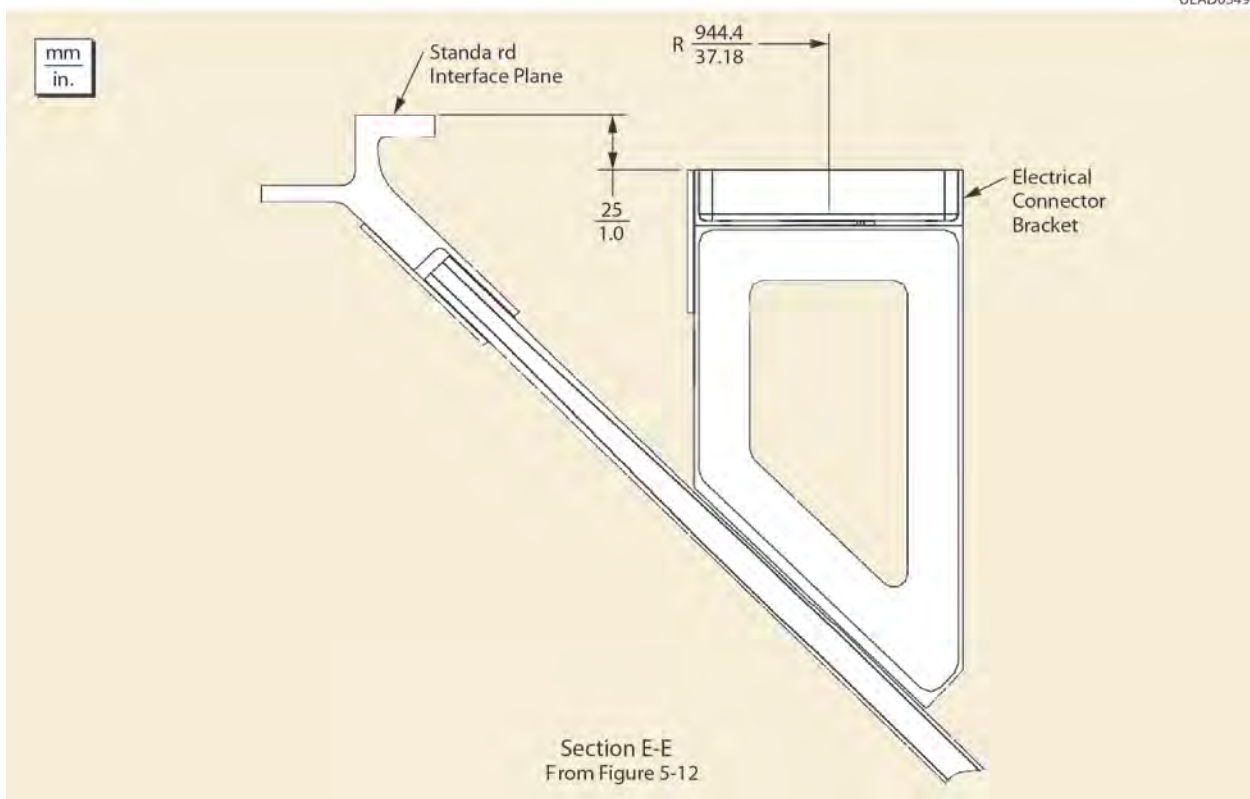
1575-5 PAF Electrical Connector Bracket (2 places)
